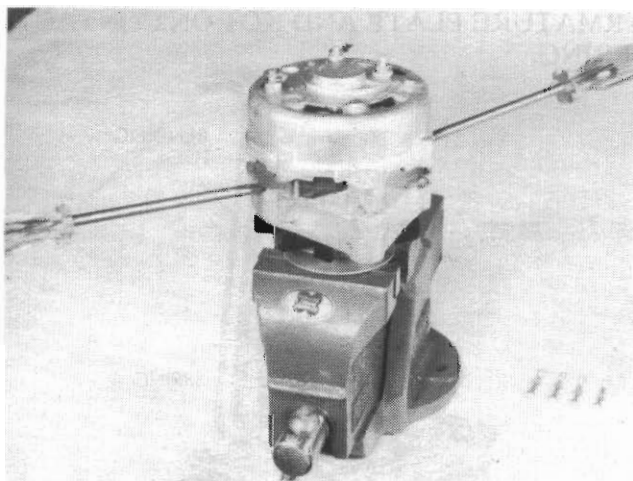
Separating the Stator and Slip Ring End-Head from the Drive-End End-Head
